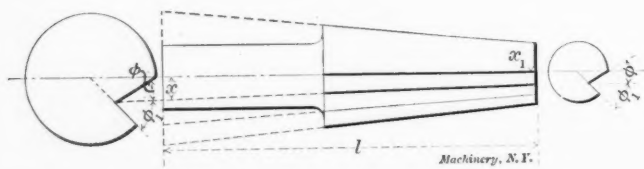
Case of a Taper Reamer milled by a Double-angle Cutter.
